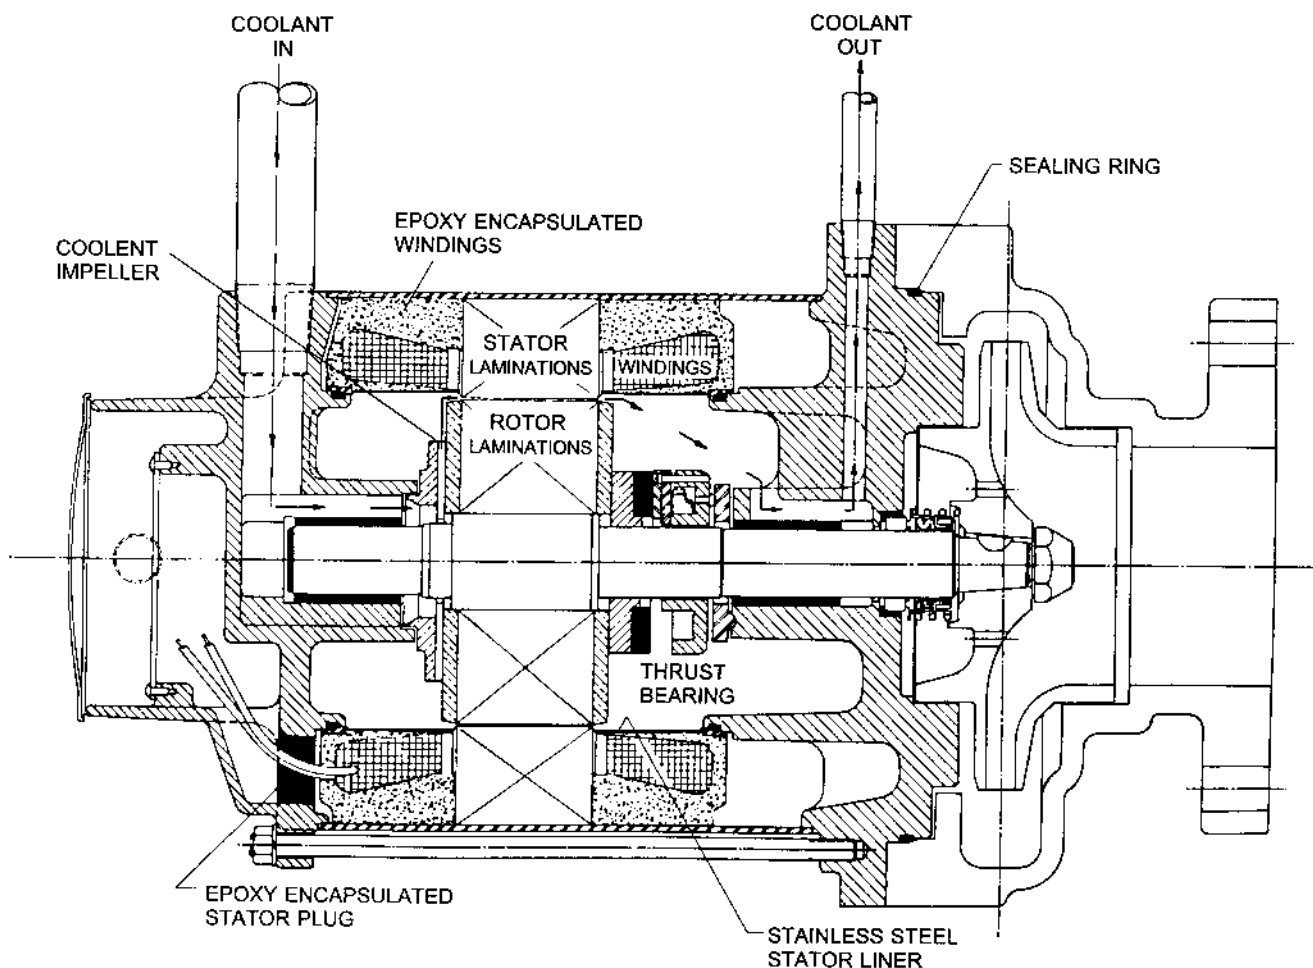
HERMETIC MOTOR AND PUMP ASSEMBLY SECTIONAL VIEW
